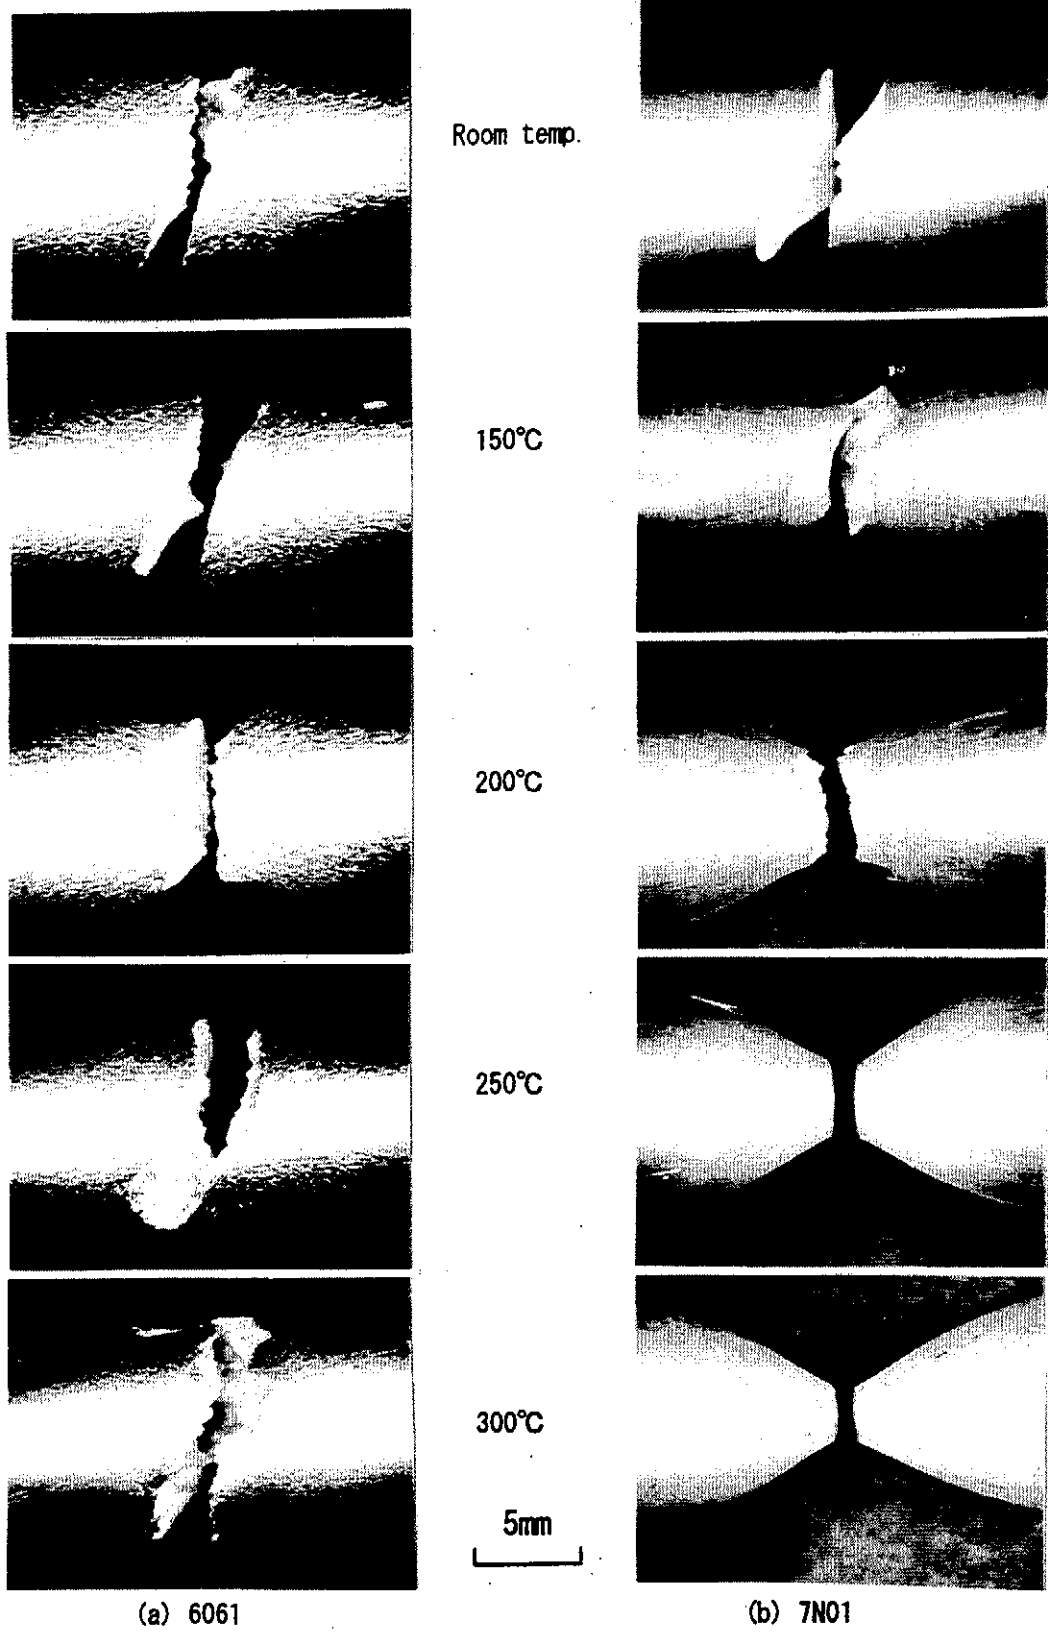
Shape of rupture on hot-tensile test of extruded rods of (a)6061 and (b)7N01 aluminum alloy observed by metallurgical microscope.
